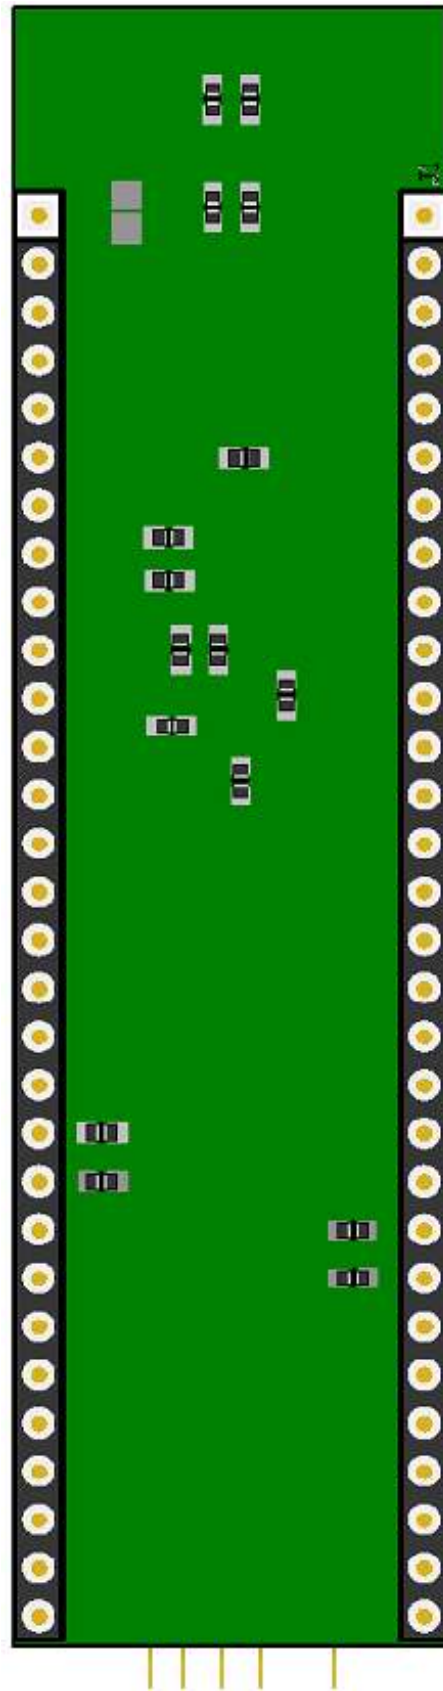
V2DIP1-64 Module Pin Out (Bottom View)
